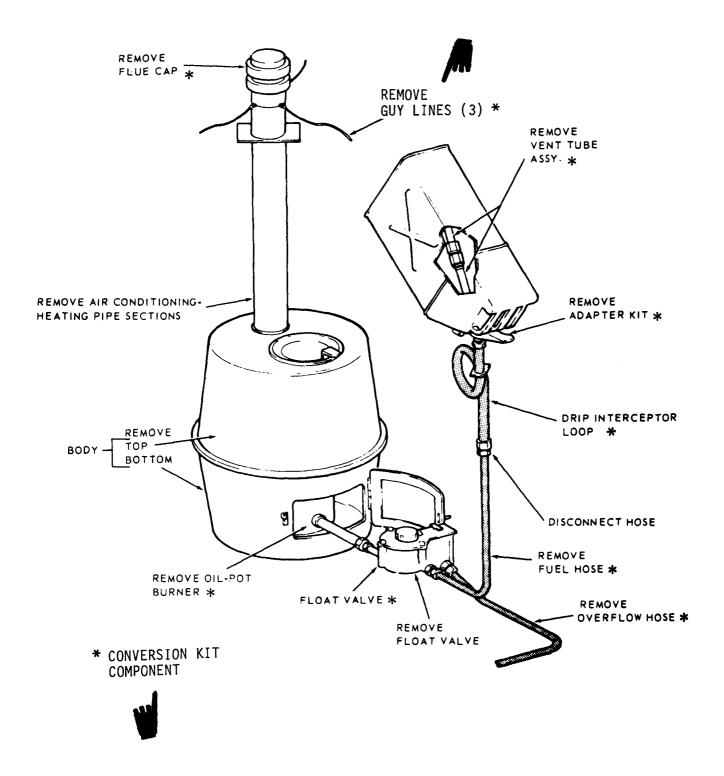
Space heater component removal and installation (Type II and Type I with Conversion Kit installed) (sheet 2 of 2).
